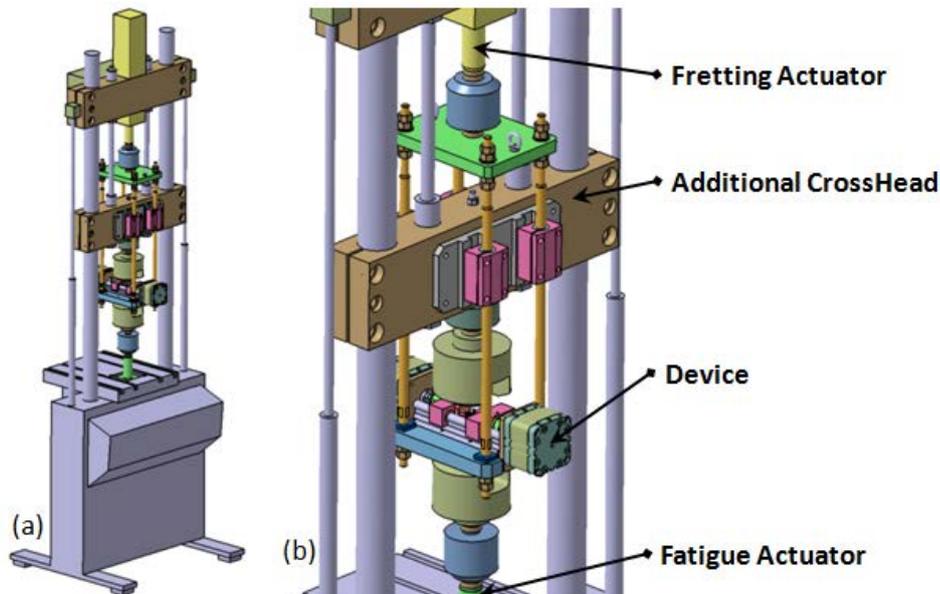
Design of the device attached to the MTS machine (a). Magnified view of the device (b).
